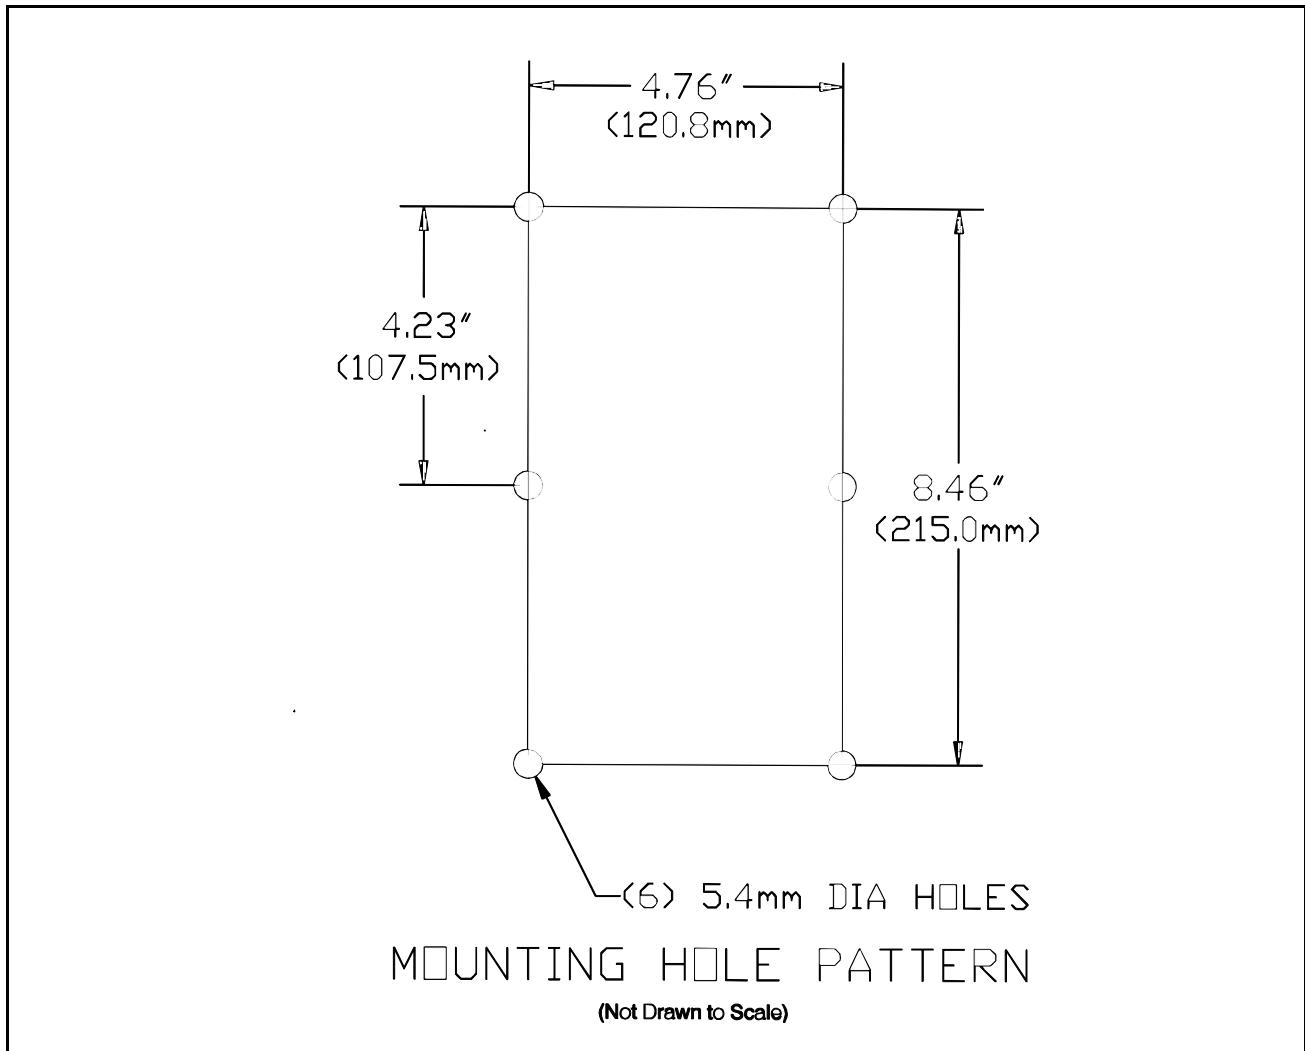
Inverting Fault Circuit Breaker Mounting Bracket Hole Pattern
